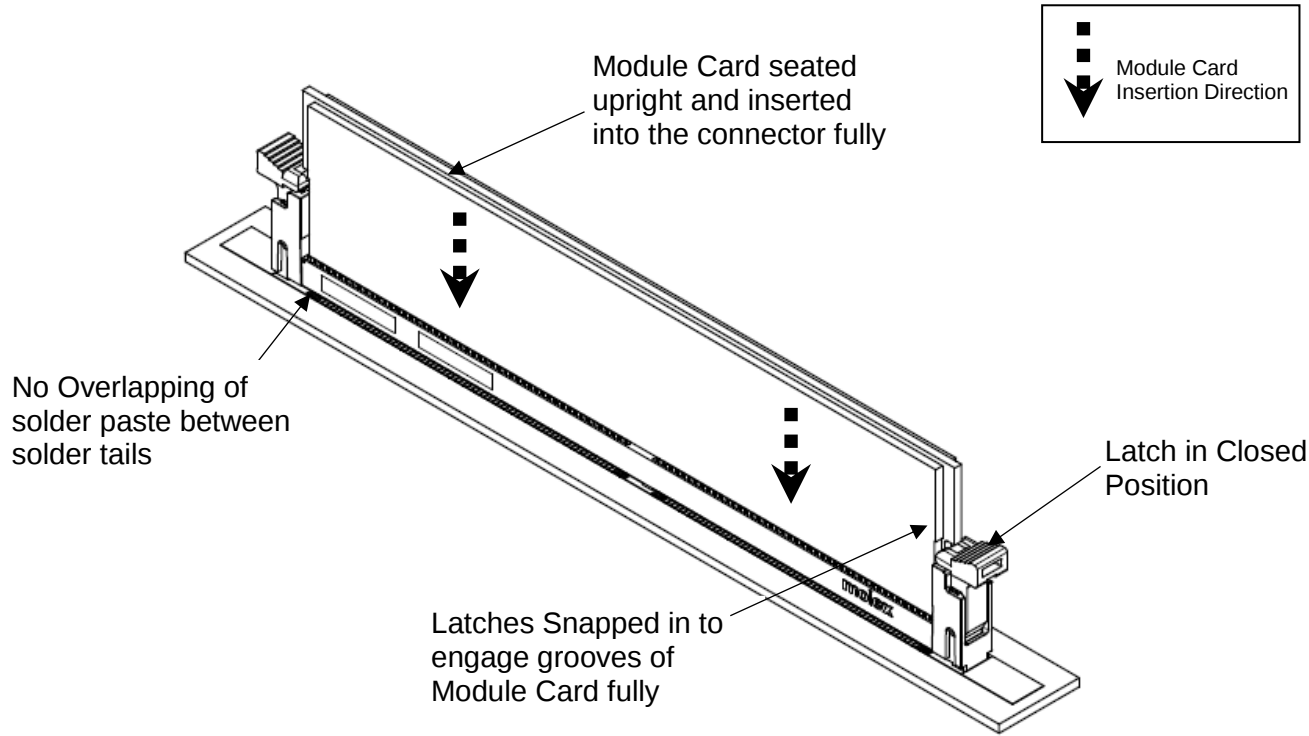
Correct Application of the DDR4 DIMM 288ckts SMT Connector, PCB and Module Card Assembly
